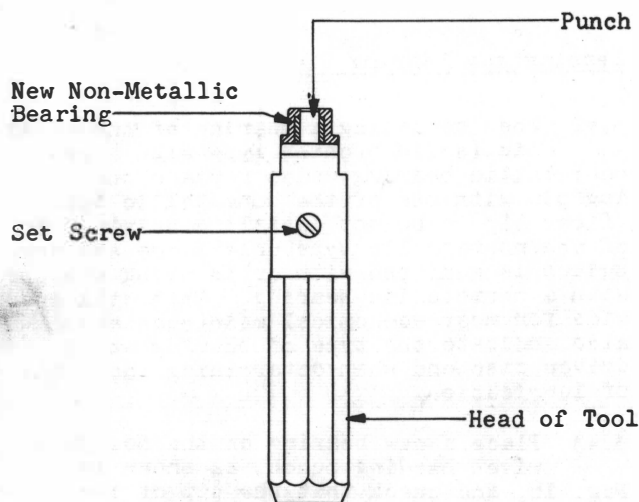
Method of Adjusting No. 398B Rivet Heading Punch When Used to Replace Bearings
